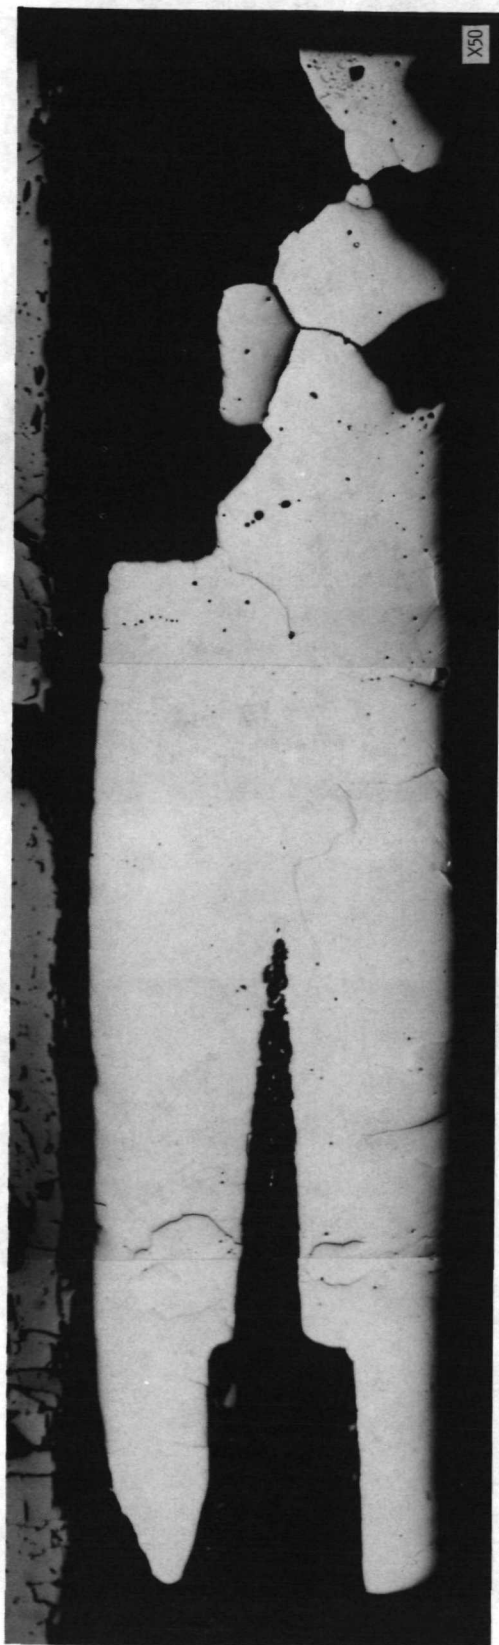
Montage of longitudinal section of vent tube after second stage of grinding into center hole. Top end was broken off and bottom end with counterbore parted from bottom end cap.
